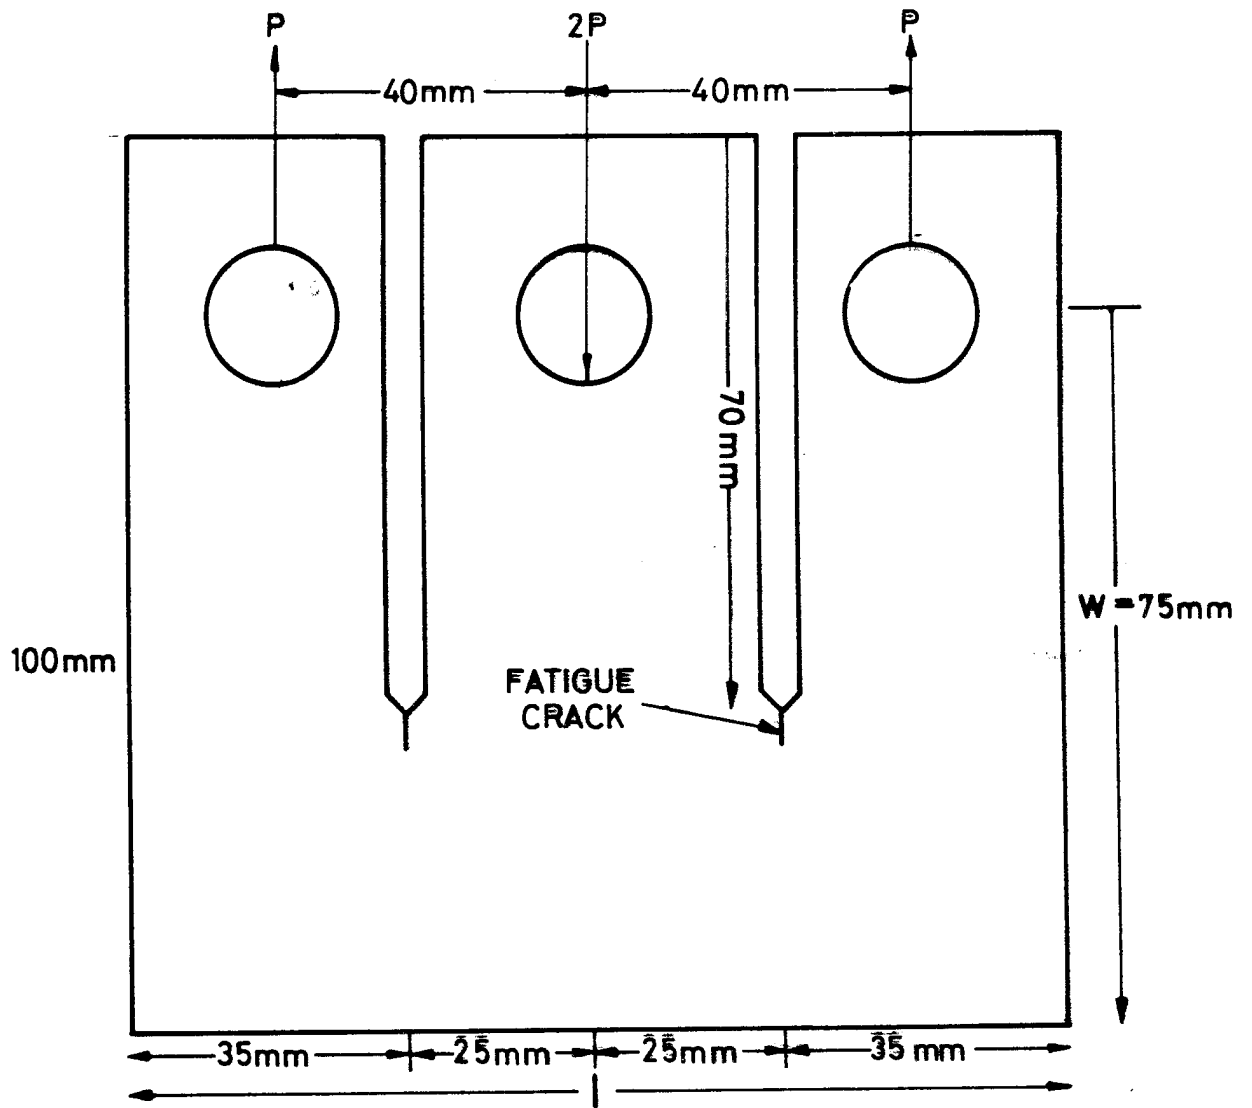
FIG. COMPACT DOUBLE SHEAR SPECIMEN.
